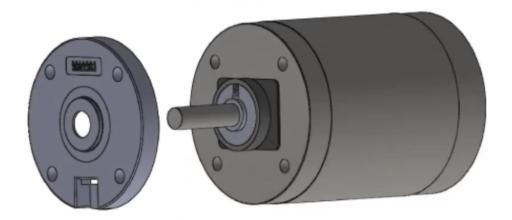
Assembly of CIMCoder onto Motor Shaft
